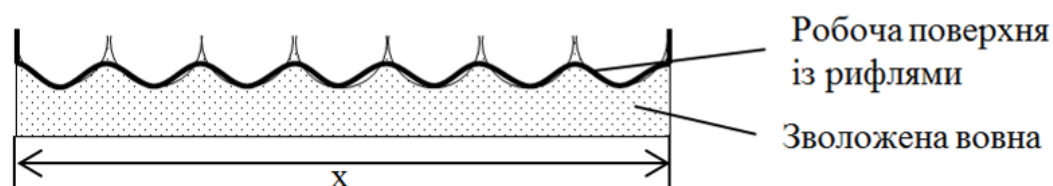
The working surface of the upper movable plate compact plate-fulling machines with ryflyamy.
